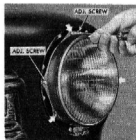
Removing Sealed Beam Retaining Ring Screws
